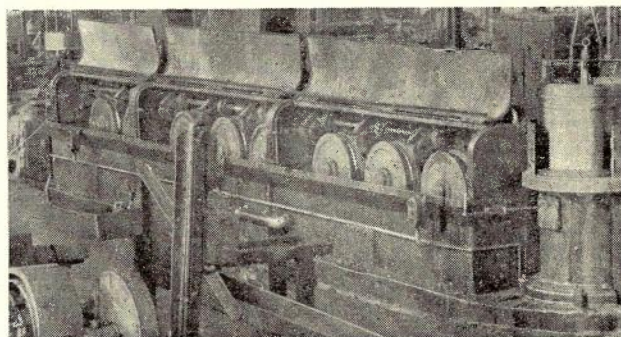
9-Die Continuous Wire-drawing Machine.
